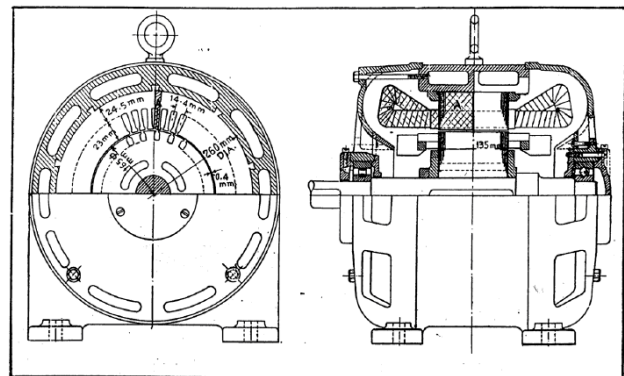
Half sectional end & sectional elevation of a 7.5 kW squirrel cage induction motor
